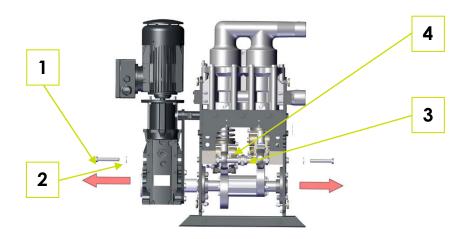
Dismounting of the shear axles, taking out the pump unit Prerequisites:
